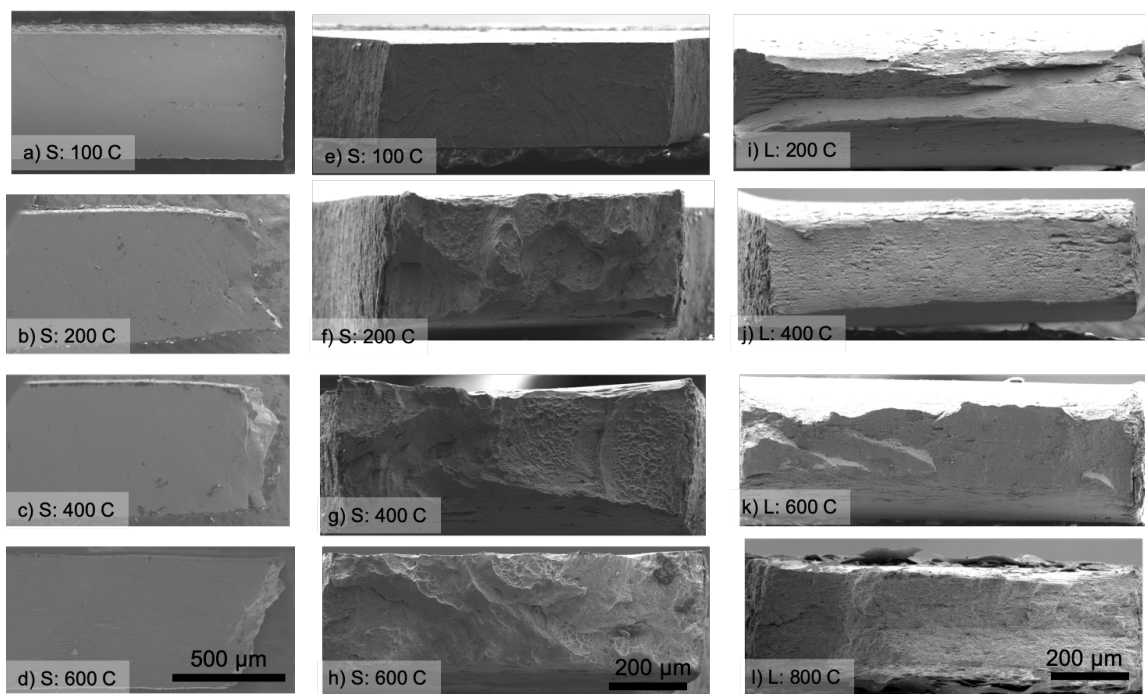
Low magnification SEM fractographs probed on the side (a-d) and fractured faces (e-h) for S-oriented tensile specimens tested at: a,e) 100°C; b,f) 200°C; c,g) 400°C; and d,h) 600°C; and fractured faces for L-oriented specimens at: i) 200°C; j) 400°C, k) 600°C; and l) 800°C, respectively. The scale bars are shown at the bottom of each column.
